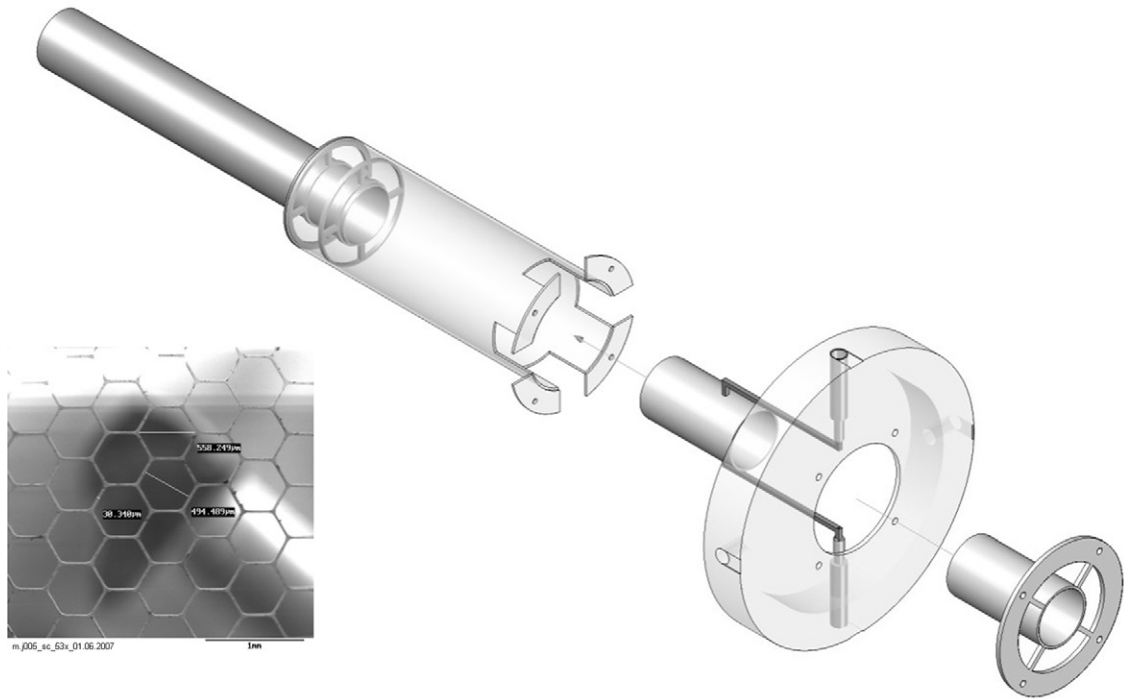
Exploded view of the Einzel lens, and a SEM view of the mesh grid.
